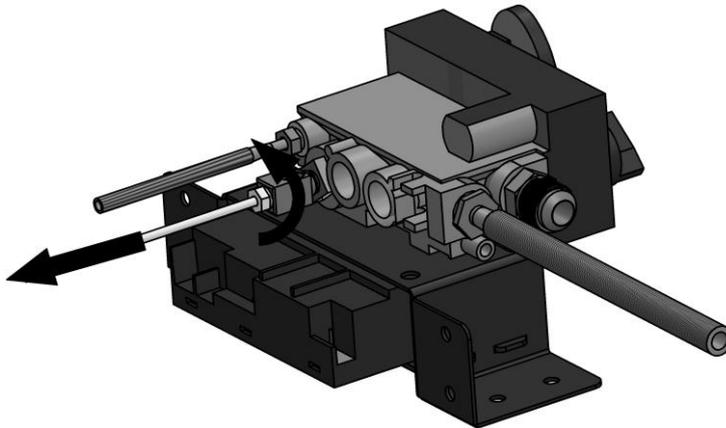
Exploded View of Pilot Parts, Receiver and Gas Valve
